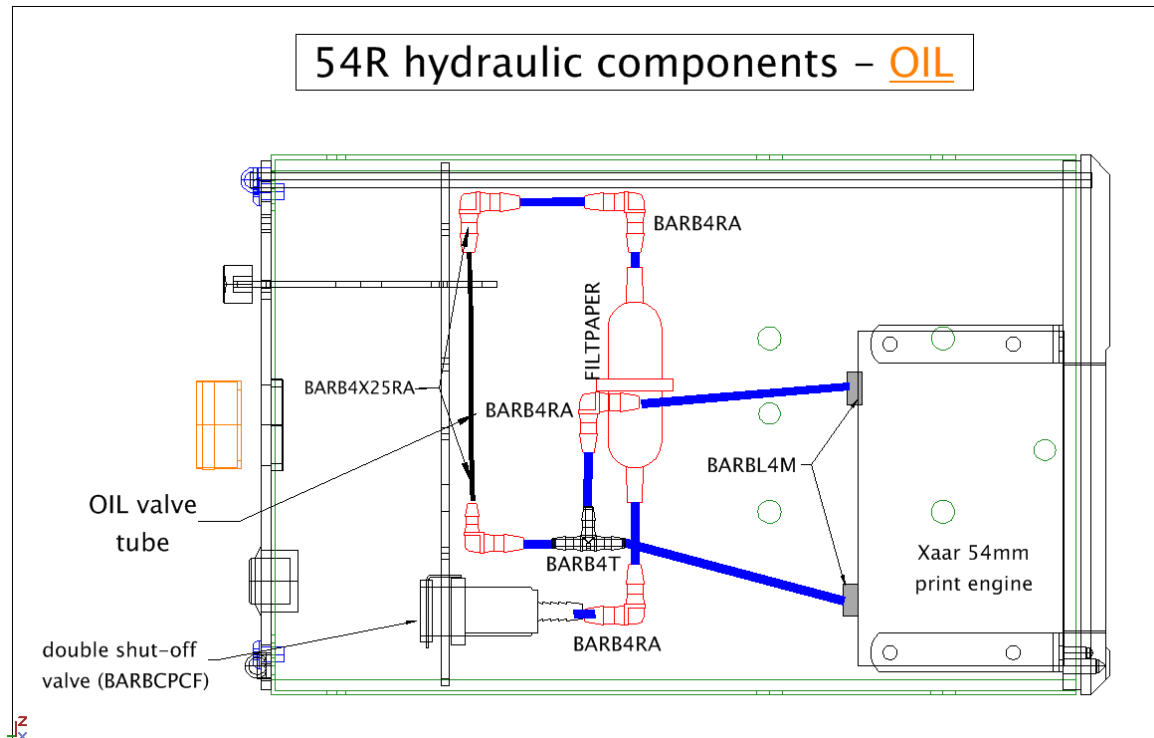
54R (TZ 54) Print-head barbs and fittings
